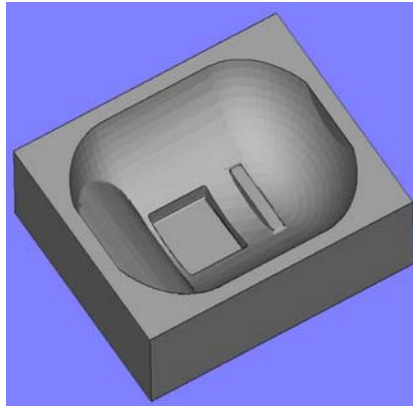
3D CAD mould model (477 x 405 x 180 mm)
